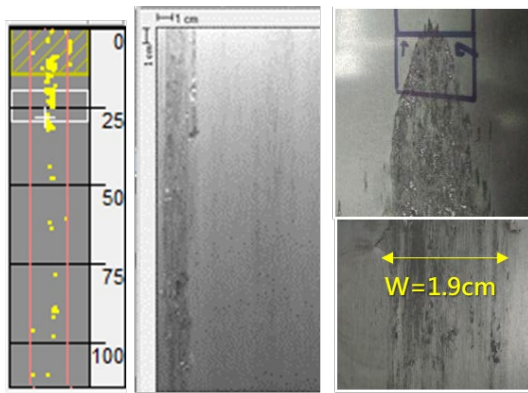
Typical steelmaking sliver defect on the surface of hot-rolled coil.
